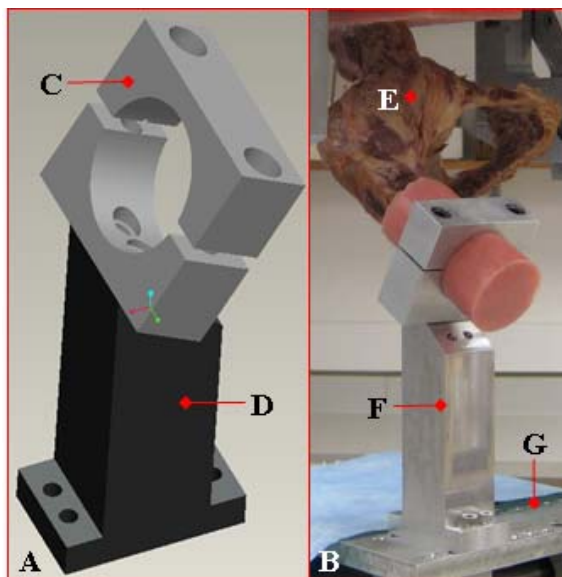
Schematic of the femur fixture assembly (A) and a photograph of it in use in the hip simulator (B). In the photograph, the femur fixture assembly (F) is attached to the x-y table (G) below, and to the femur of a cadaveric specimen (E).
